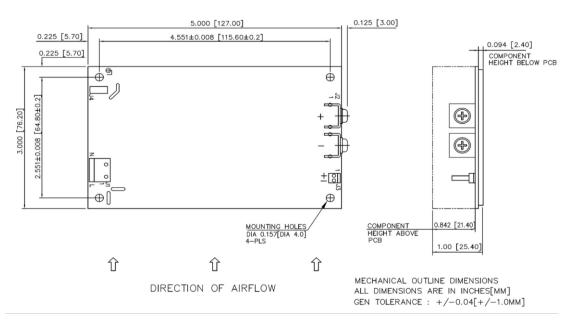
Mechanical Drawing - Screw Terminal (Option 1)
